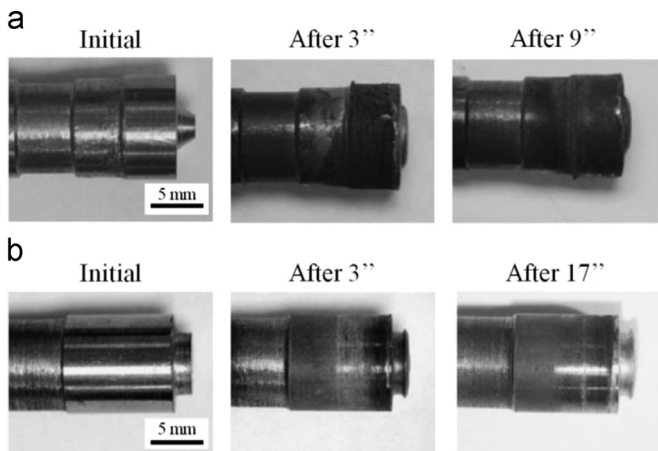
Changes in tool profiles with increased weld length for (a) W-La tool and (b) W-La-L tool. Note that the total weld length is higher for the W-La-L tool.
